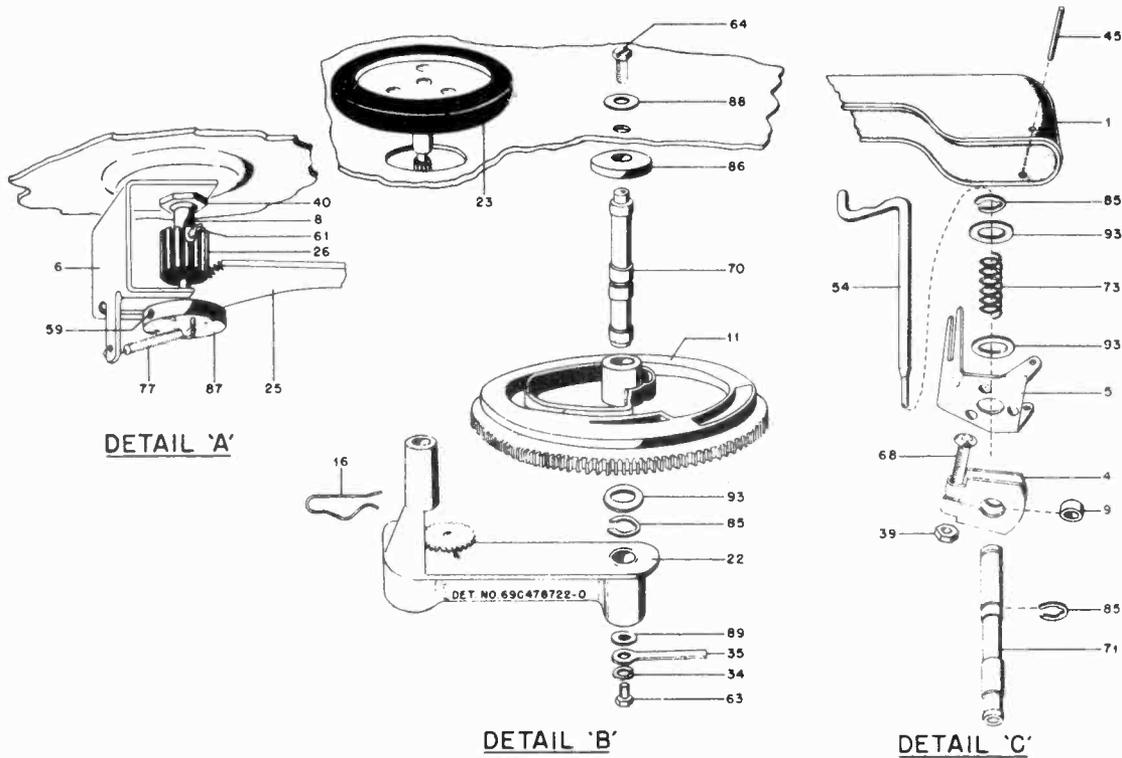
PARTS LOCATION - DETAILED ASSEMBLIES
